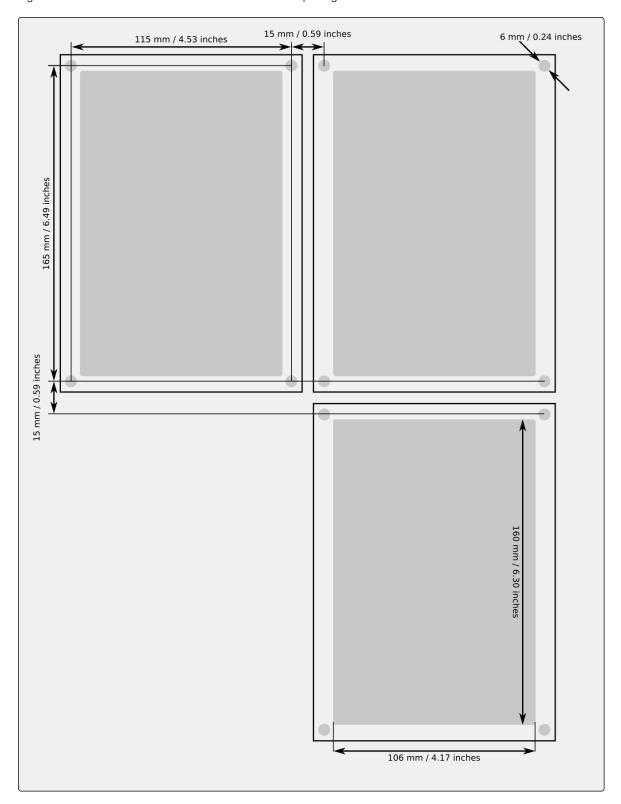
168. Panel cutout dimensions and device spacing.
